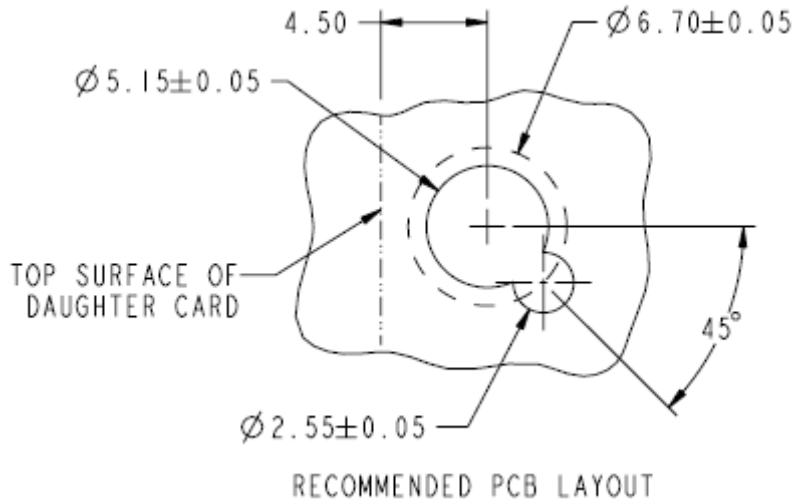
Recommended Guide Pin Midplane PCB Layout (Midplane Component Side)<sup>1</sup>
